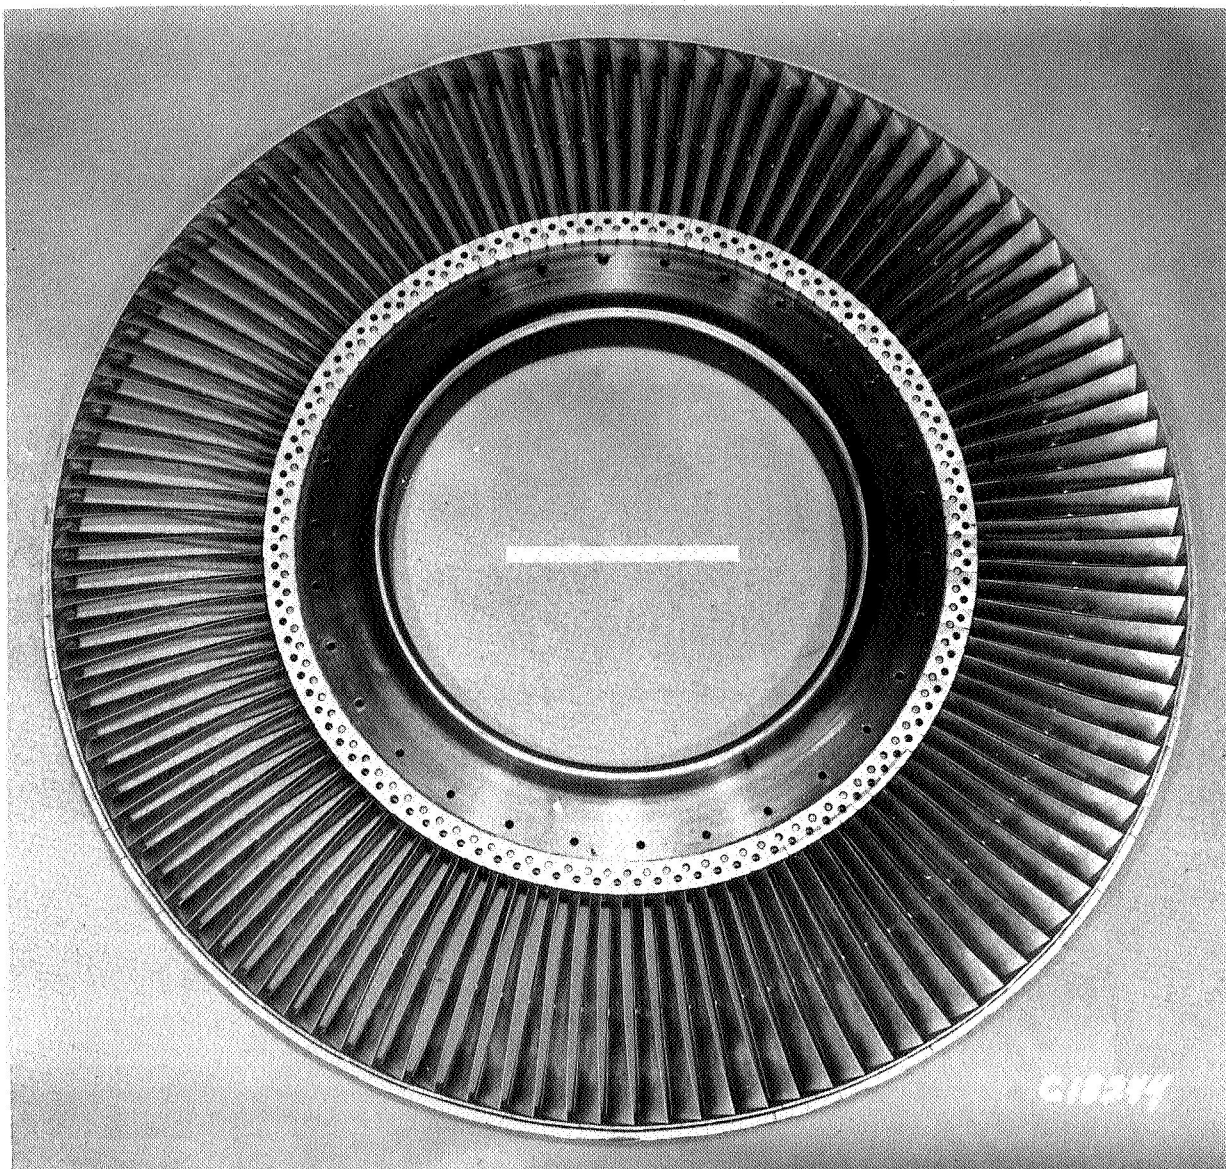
Stage Three Tandem Blade Rotor Assembled.
